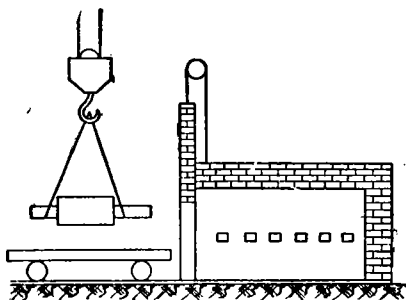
Box-type furnace with movable bottom (car-bottom furnace).
